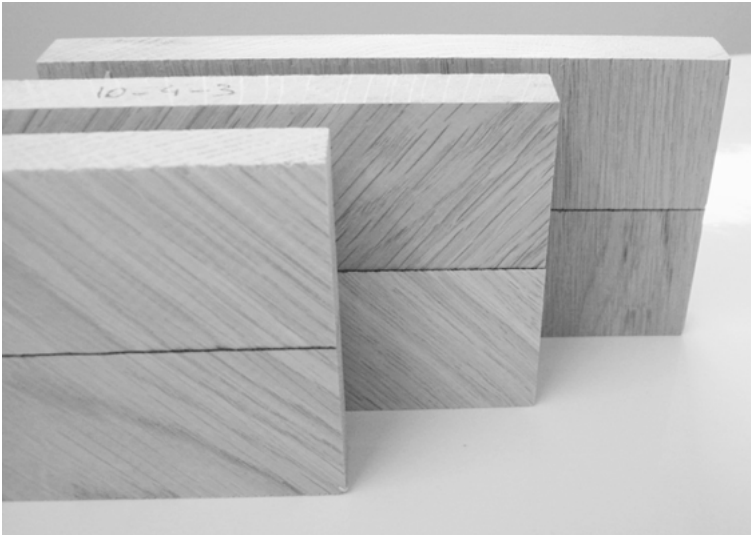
Examples of different butt joints obtained by end-grain welding of oak wood [16].
